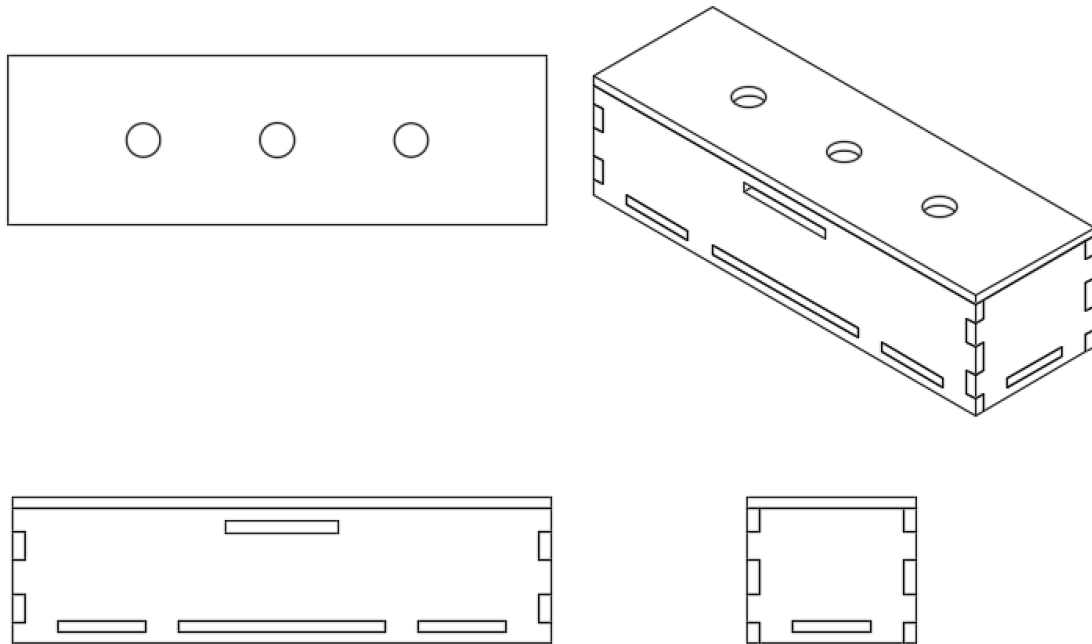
Fusion 360 drawings of the IR sensor enclosure.
